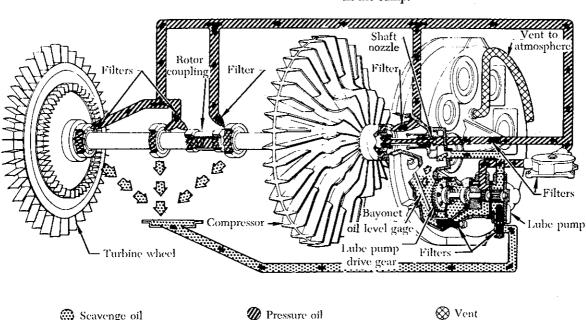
Turbojet engine wet-sump lubrication system.
